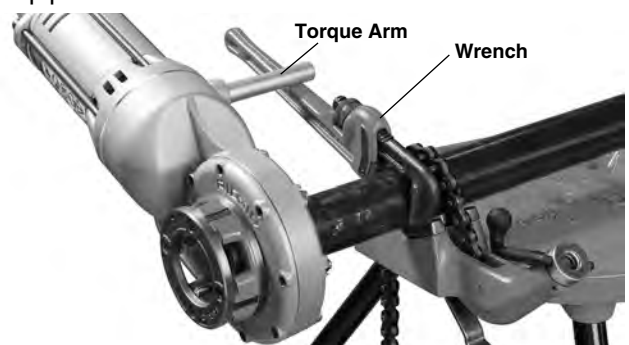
Threading Using Pipe Wrench as a Support Arm
